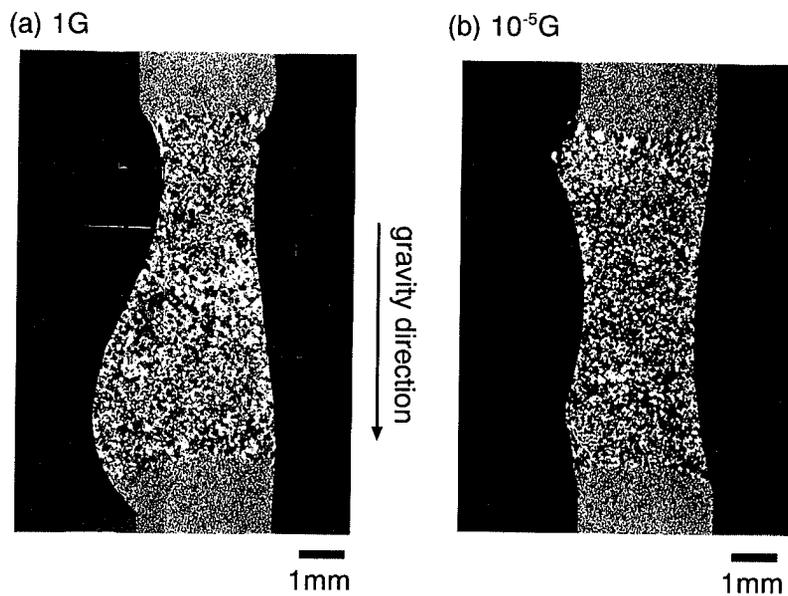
Transverse sections of bead-on-plate welds in horizontal welding with argon shielding gas.
